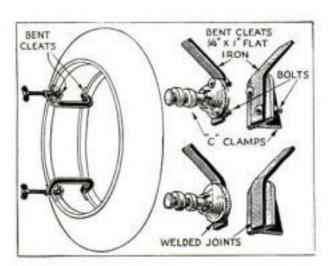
Tire spreaders that are handy for heavy work are made of strap iron welded to C clamps
